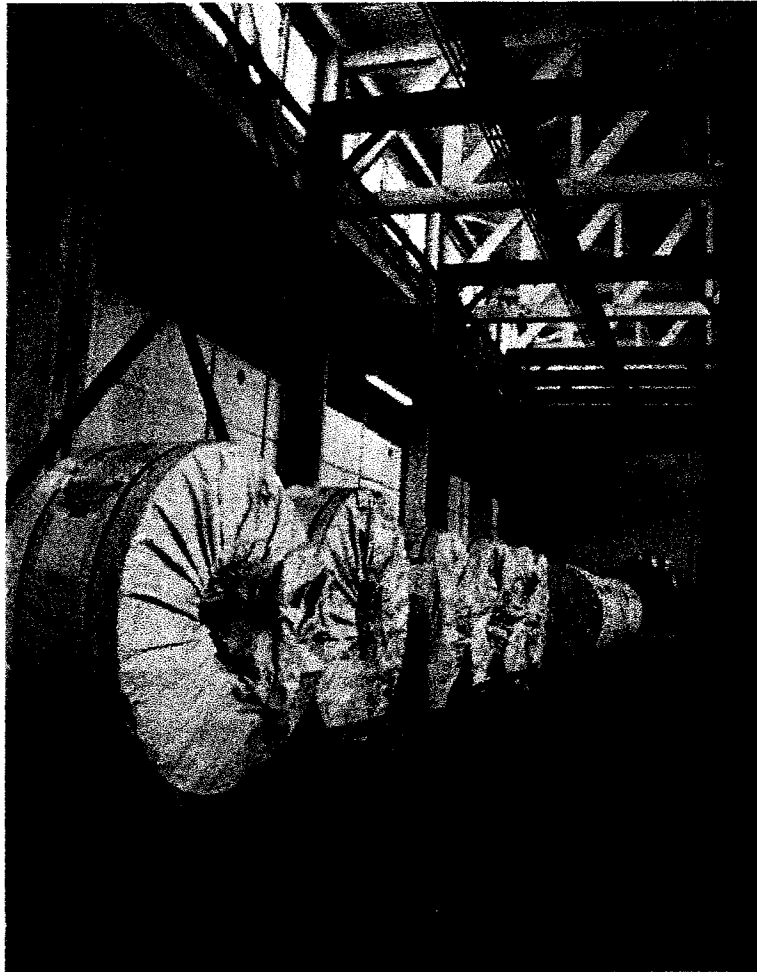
Stainless Steel Coils Waiting to be Processed Under Hoist Rail
